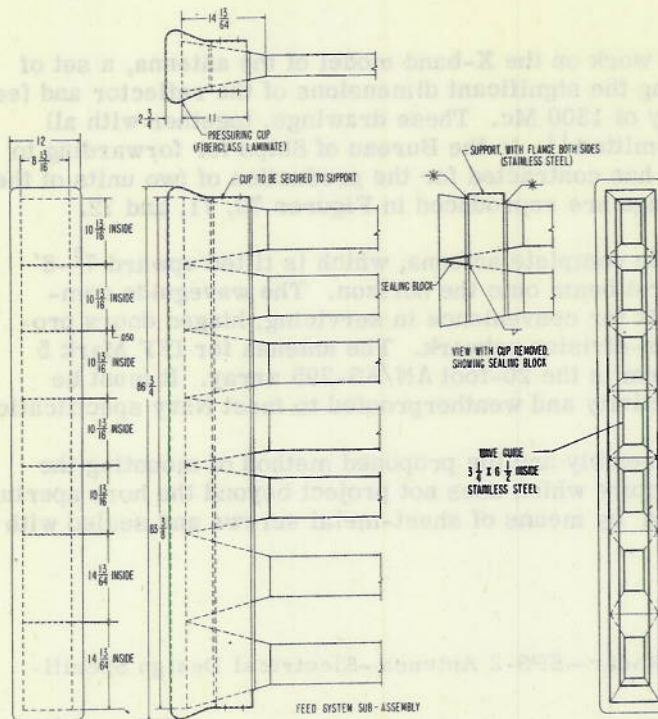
NRL outline drawing of feed horns and pressurizing cover
